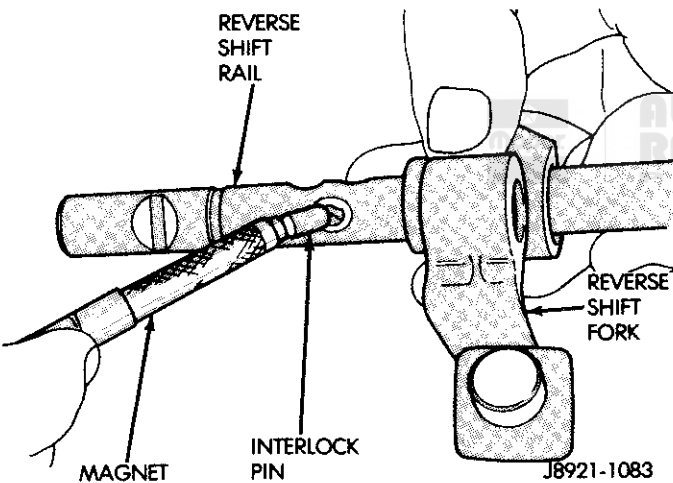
Removing Reverse Shift Rail Interlock Pin
